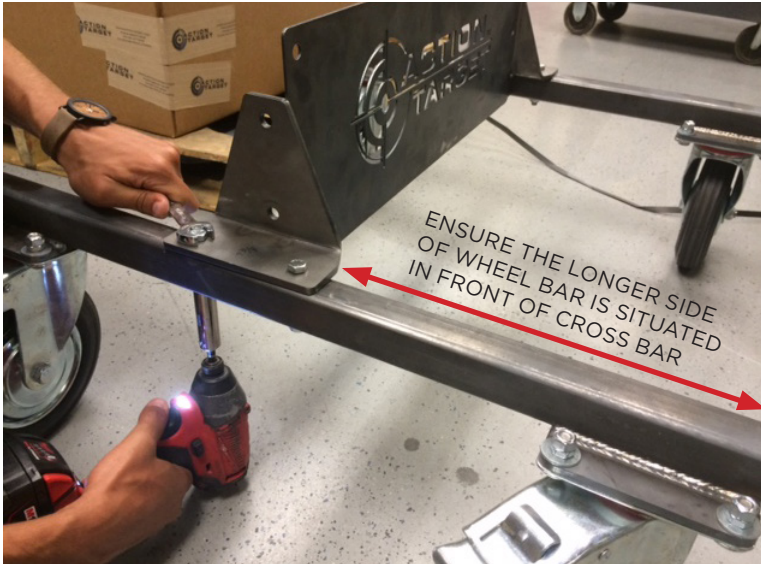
TIGHTEN FLAT WASHERS AND STOVERS ONTO WHEEL BAR CARRIAGE BOLTS
